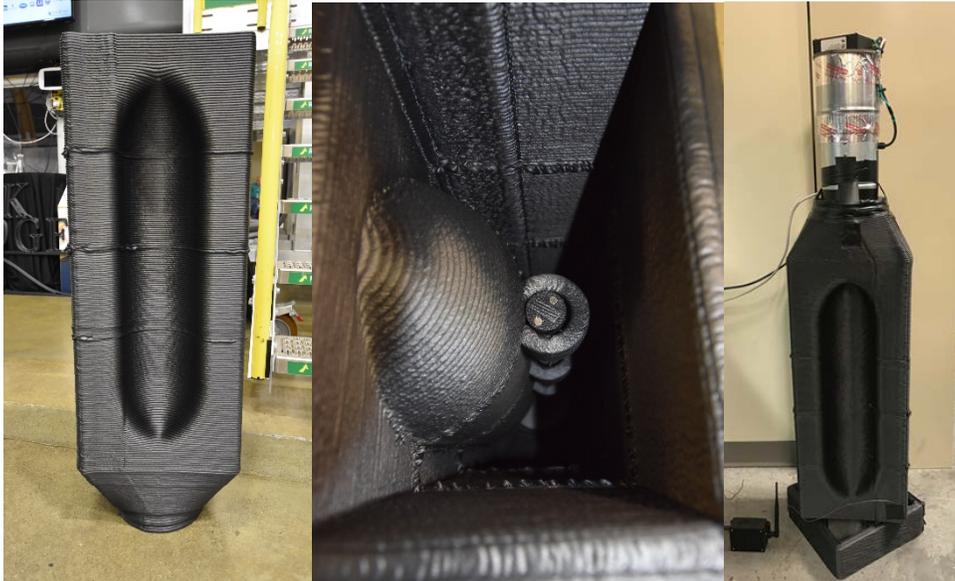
Printed tool on left with sensor modules inserted. Internal cavity of tool in the middle. Sensor module test rig with heater on right.
